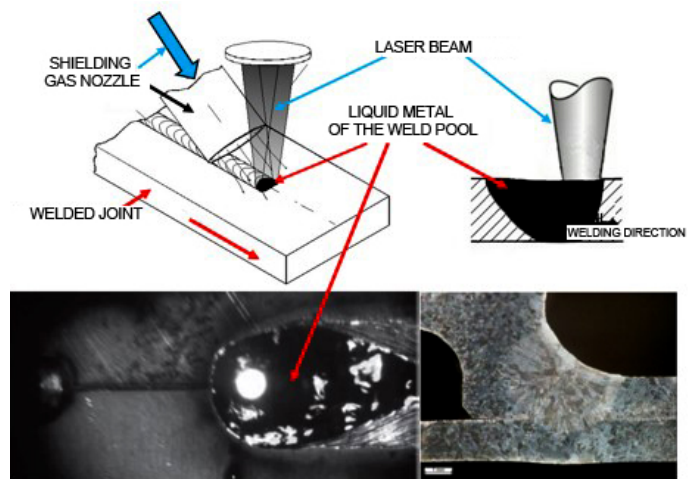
Schematic diagram of the melt-in welding of butt joints, (a) liquid metal pool recorded using a high-speed camera (b) macrostructure of the melt-in HPDL diode laser welded joint of a nozzle unit ring (c) made of high-temperature creep resisting austenitic steel EI-835 (type 25-16-6) [1]
